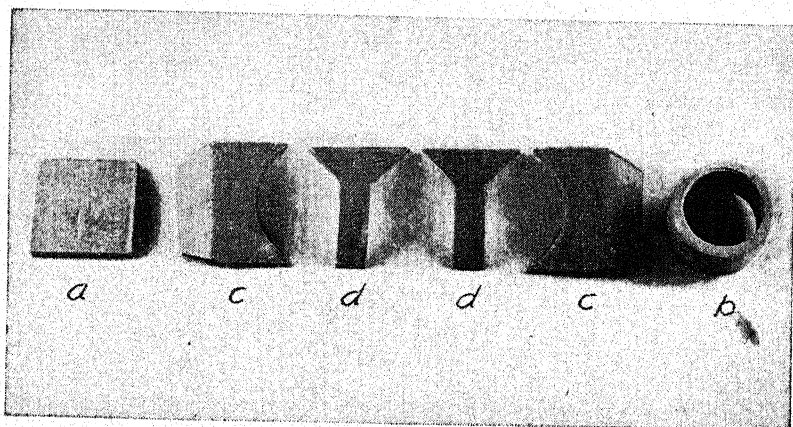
Material for duct forming transition between rectangular exhaust port and circular exhaust pipe.
